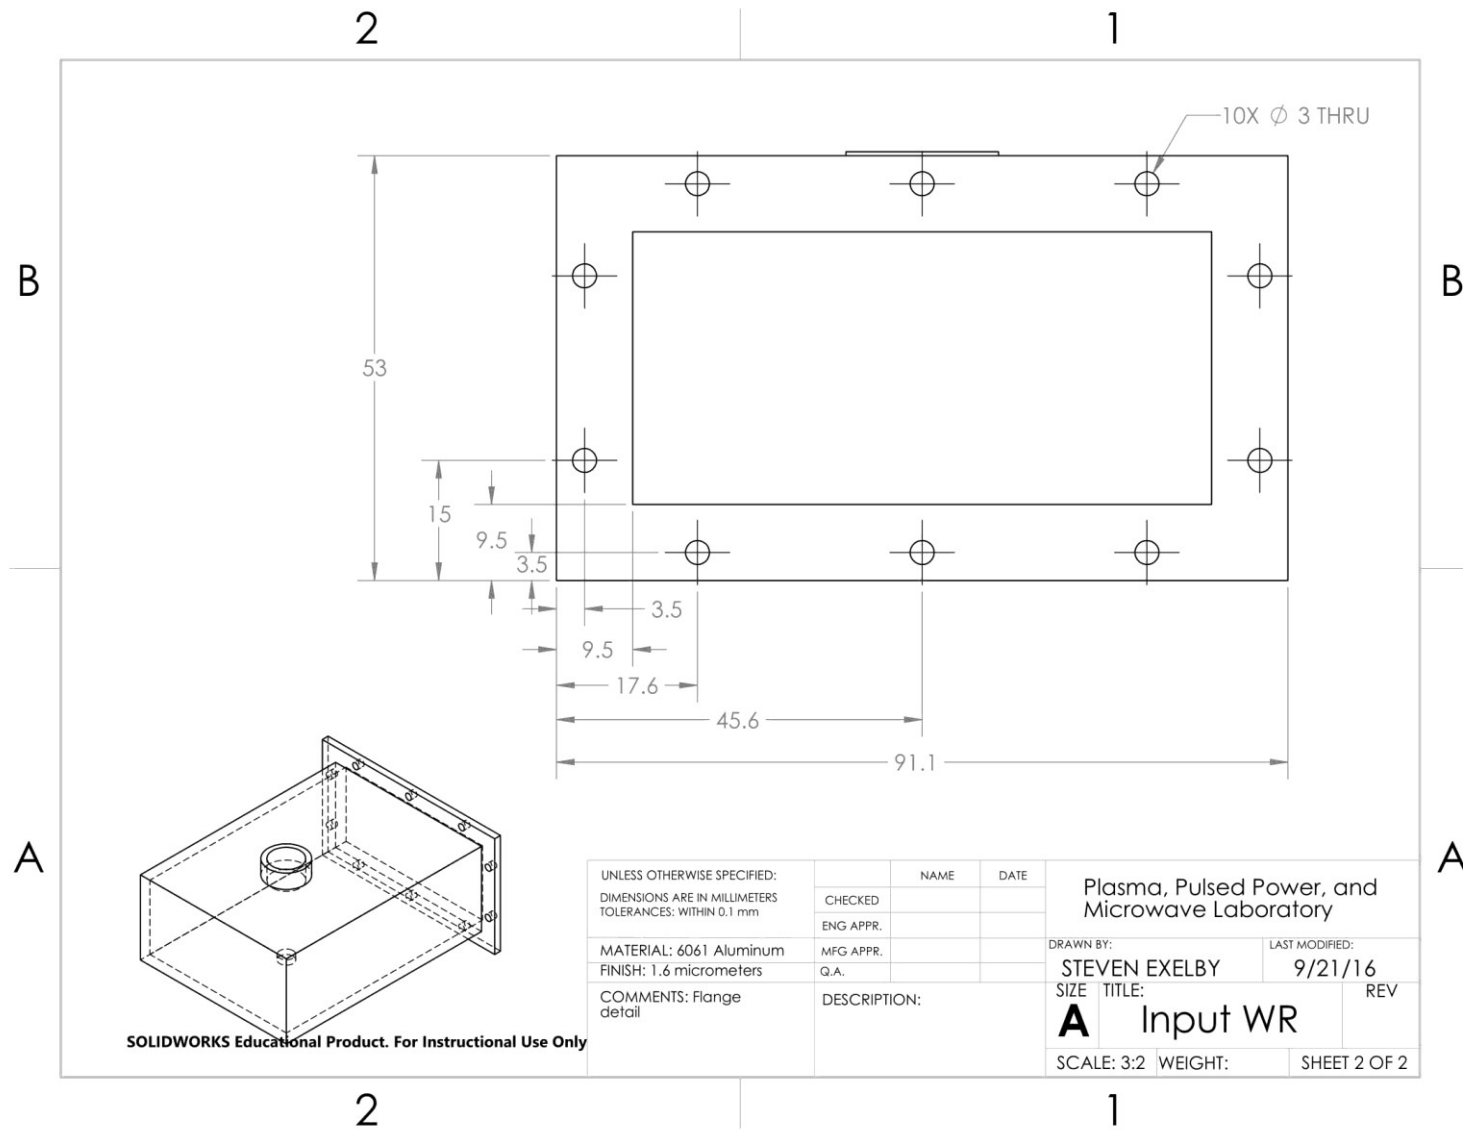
Input side waveguide to RPCFA adaptor. A puck coupler is bolted through the small hole in the bottom, page 2.
